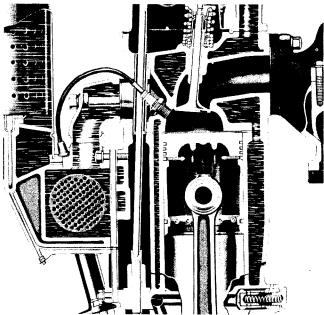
Sectional View Showing Water Passages in head and block, and manifold
